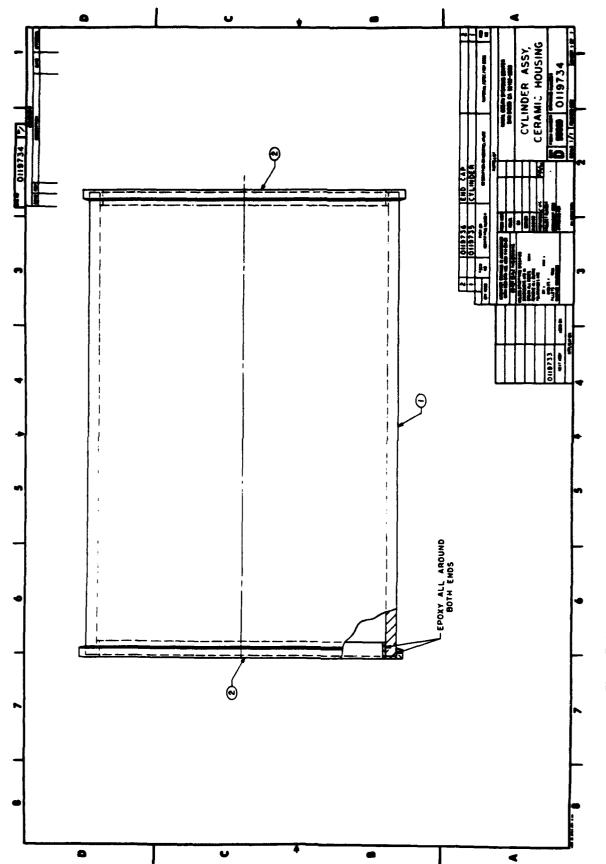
12-inch-diameter cylindrical ceramic housing section equipped with Mod 0 end cape.
